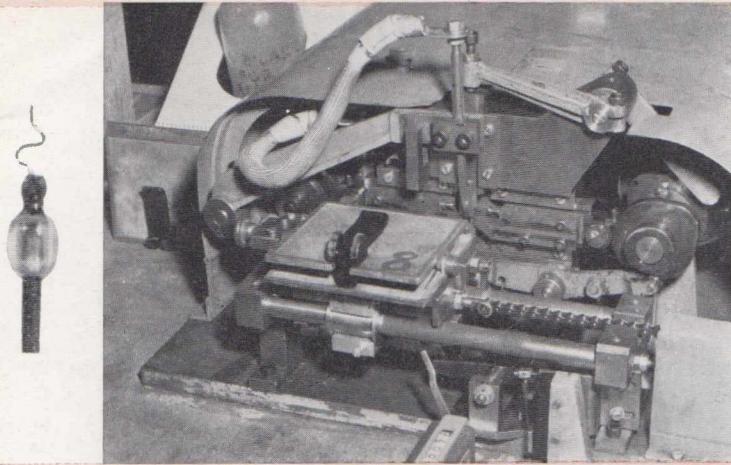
Whisker forming and welding machine used during manufacture of anode assemblies. On left is a completed anode assembly.
